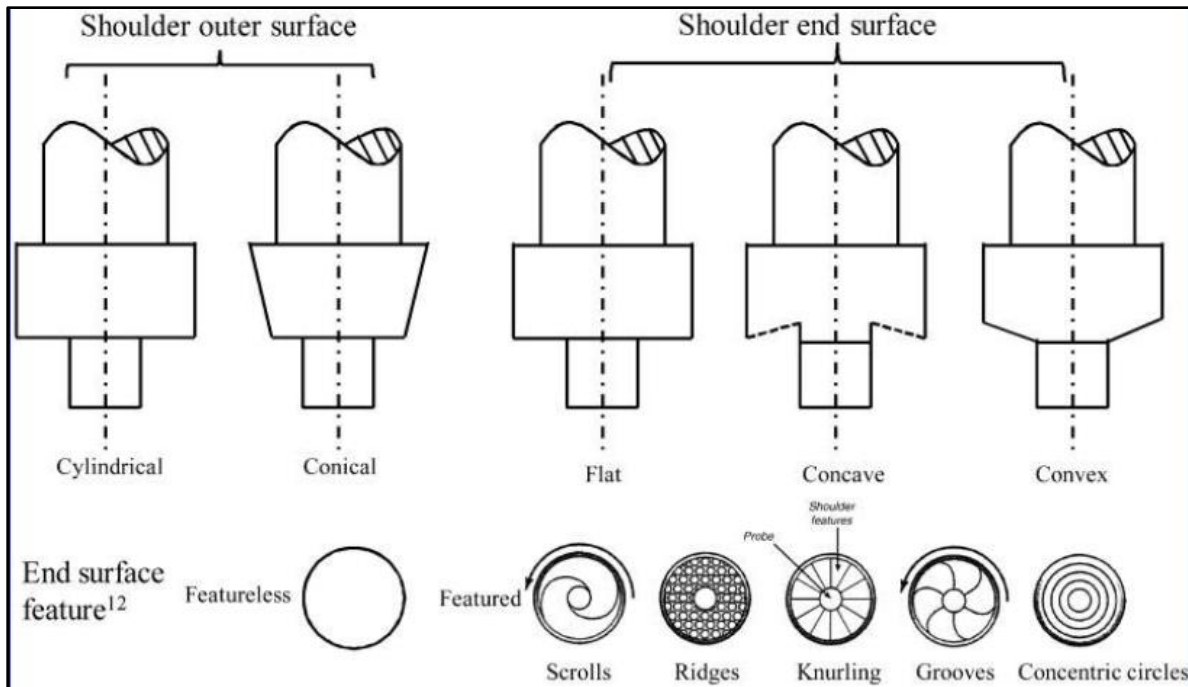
Examples of different designs for the FSW tool shoulder [18]
